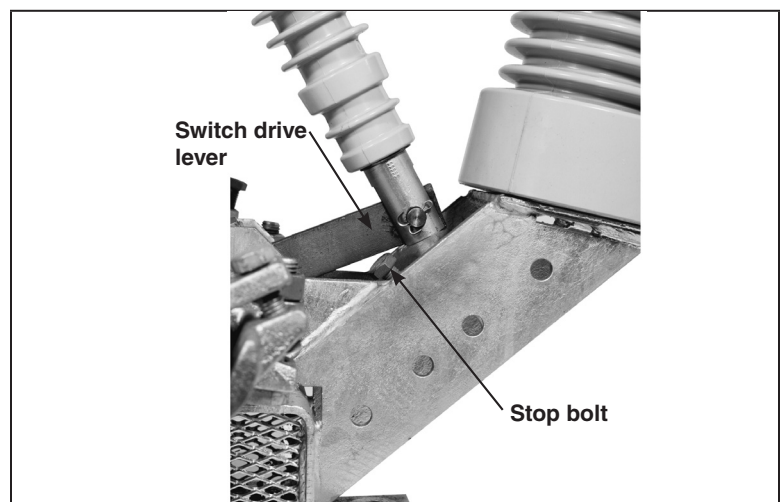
Verify the switch drive lever assembly is within $\frac{1}{16}$ -inch of the closed stop bolt.
